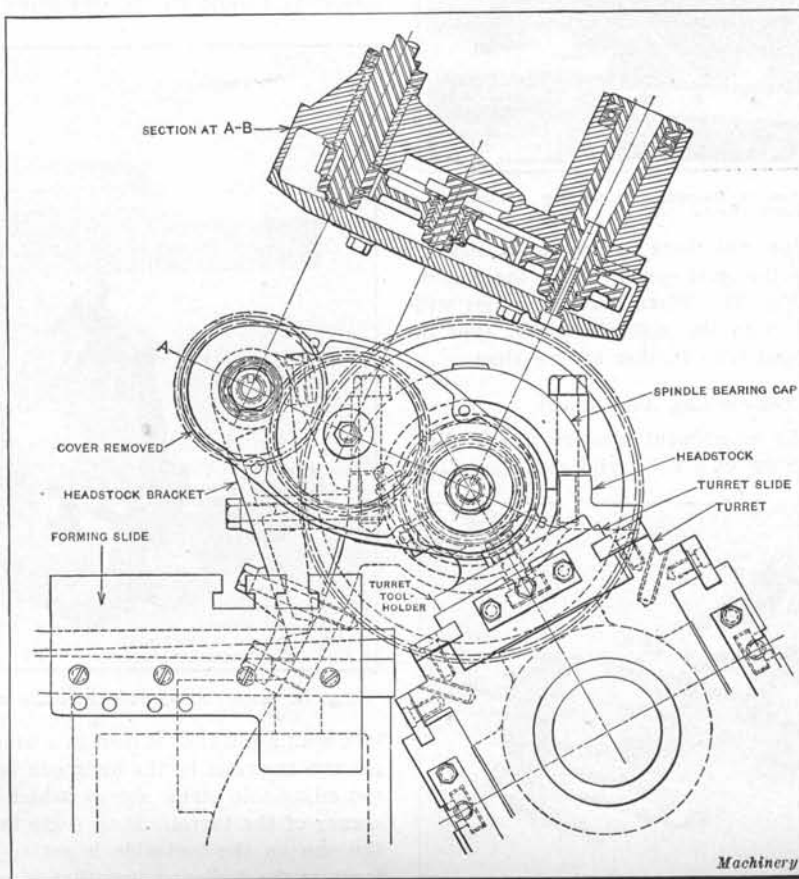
End Elevation and Sectional View of Attachment shown in Fig. 23
